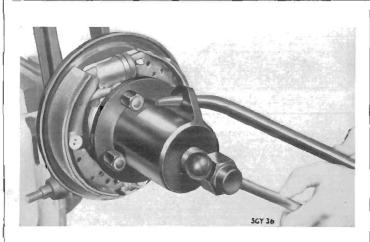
Using Churchill extractor No. S109 to remove rear hub
